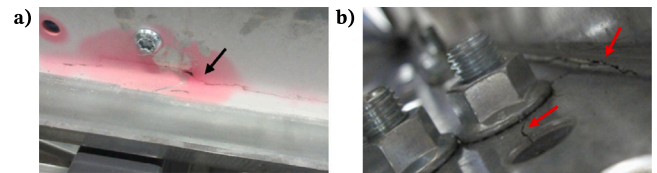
Fatigue cracking on cold-formed corners: cracking on a shuttle guide rail (a) and bolted beam-to-upright connection (b).
